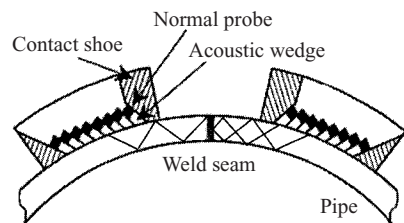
Probe layout of the multi-probe UT for ERW Steel pipe
